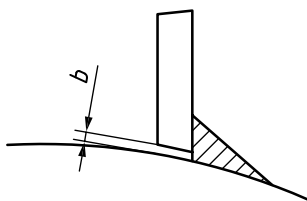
Weld preparation and fit-up — Butt welds in circular hollow sections brace to chord joints
